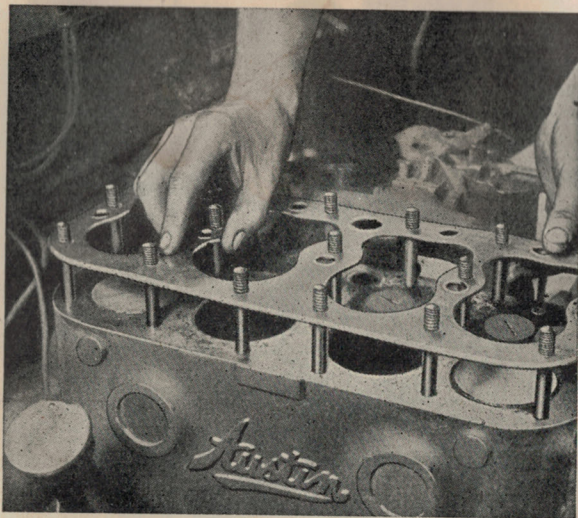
REPLACING CYLINDER-HEAD GASKET
